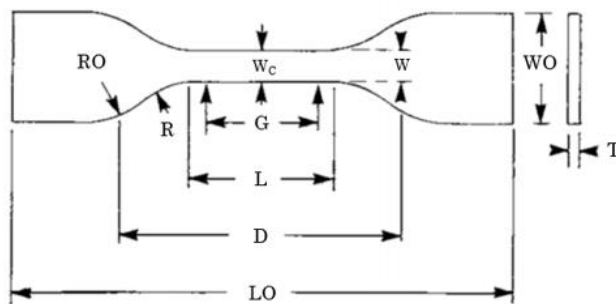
Type IV dumbbell specimen dimensions according to ASTM D638¹⁸⁸.
